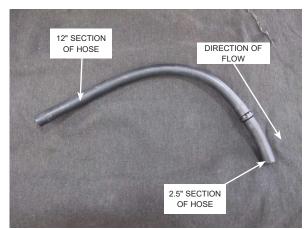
h: Hose Arrangement w/Provided Check Valve
